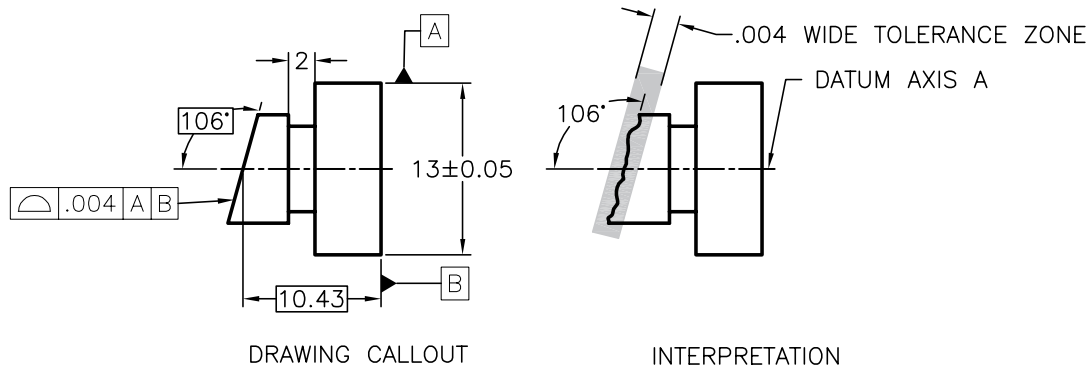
Profile-of-a-surface tolerance zone
